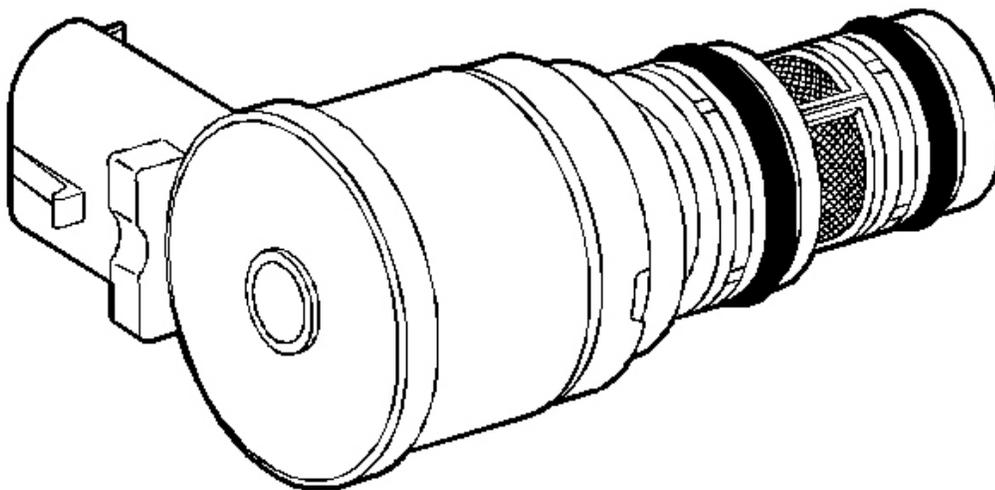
3-2 Shift Solenoid Valve Assembly
